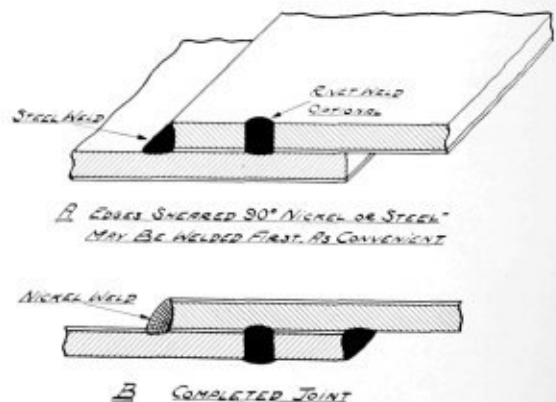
Lap welded joint, metallic arc welded
